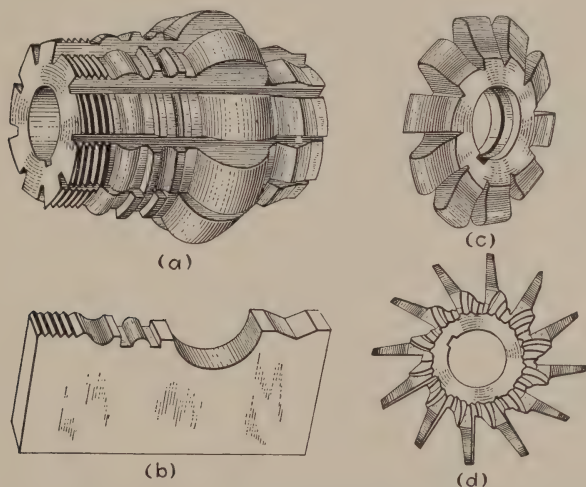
Formed cutters. In (a) is shown a very special formed cutter, and in (b) the milled piece; (c) illustrates a gear cutter. Practically all gear cutters used in milling machines are “formed” cutters. All formed cutters are sharpened by grinding the face of the tooth *radially*, and (d) shows a gear cutter which has been sharpened many times, but whose contour has not been changed.
